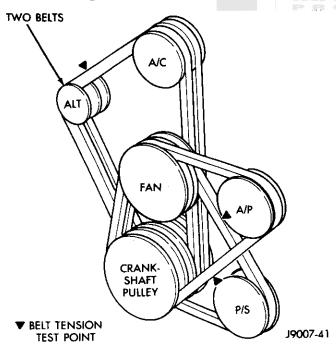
Alternator, Air Pump, A/C, and Power Steering – 3.9L, 5.2L and 5.9L Engines
